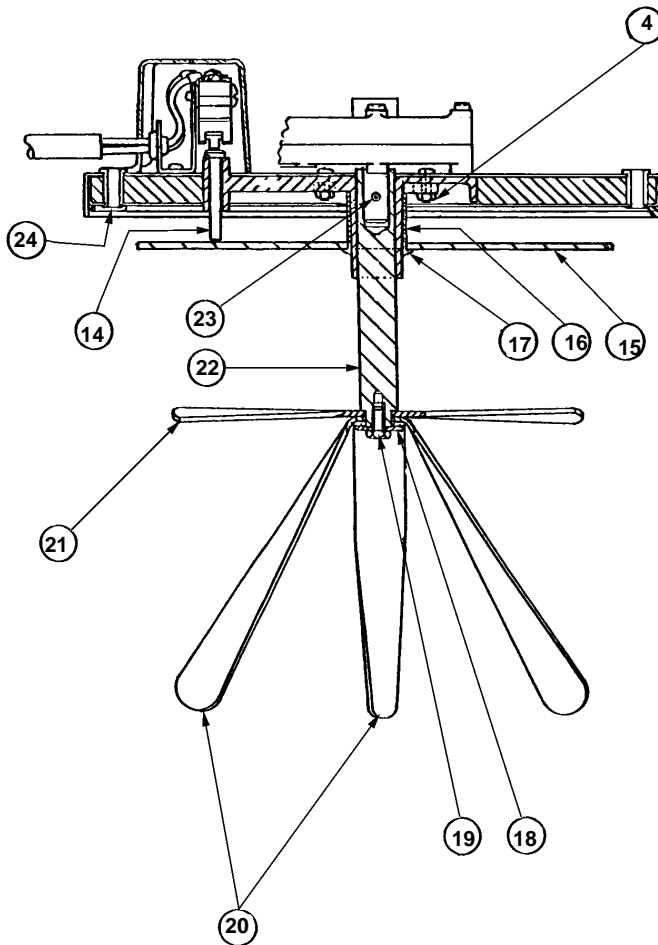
WATER CONTROL ASSEMBLY AND PARTS LIST PART NO. 32843 IMD 300-15
